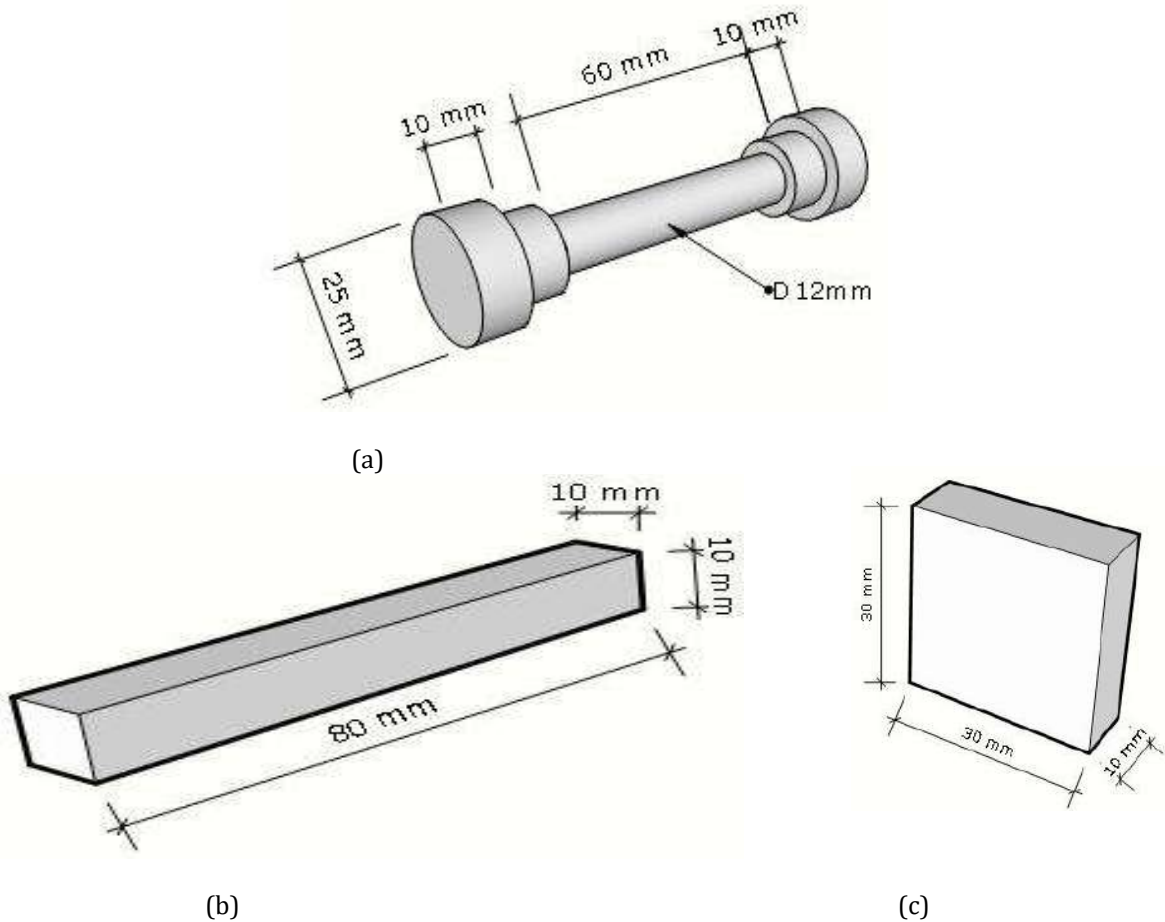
Specimen for: (a) tensile test (b) impact test (c) hardness test
